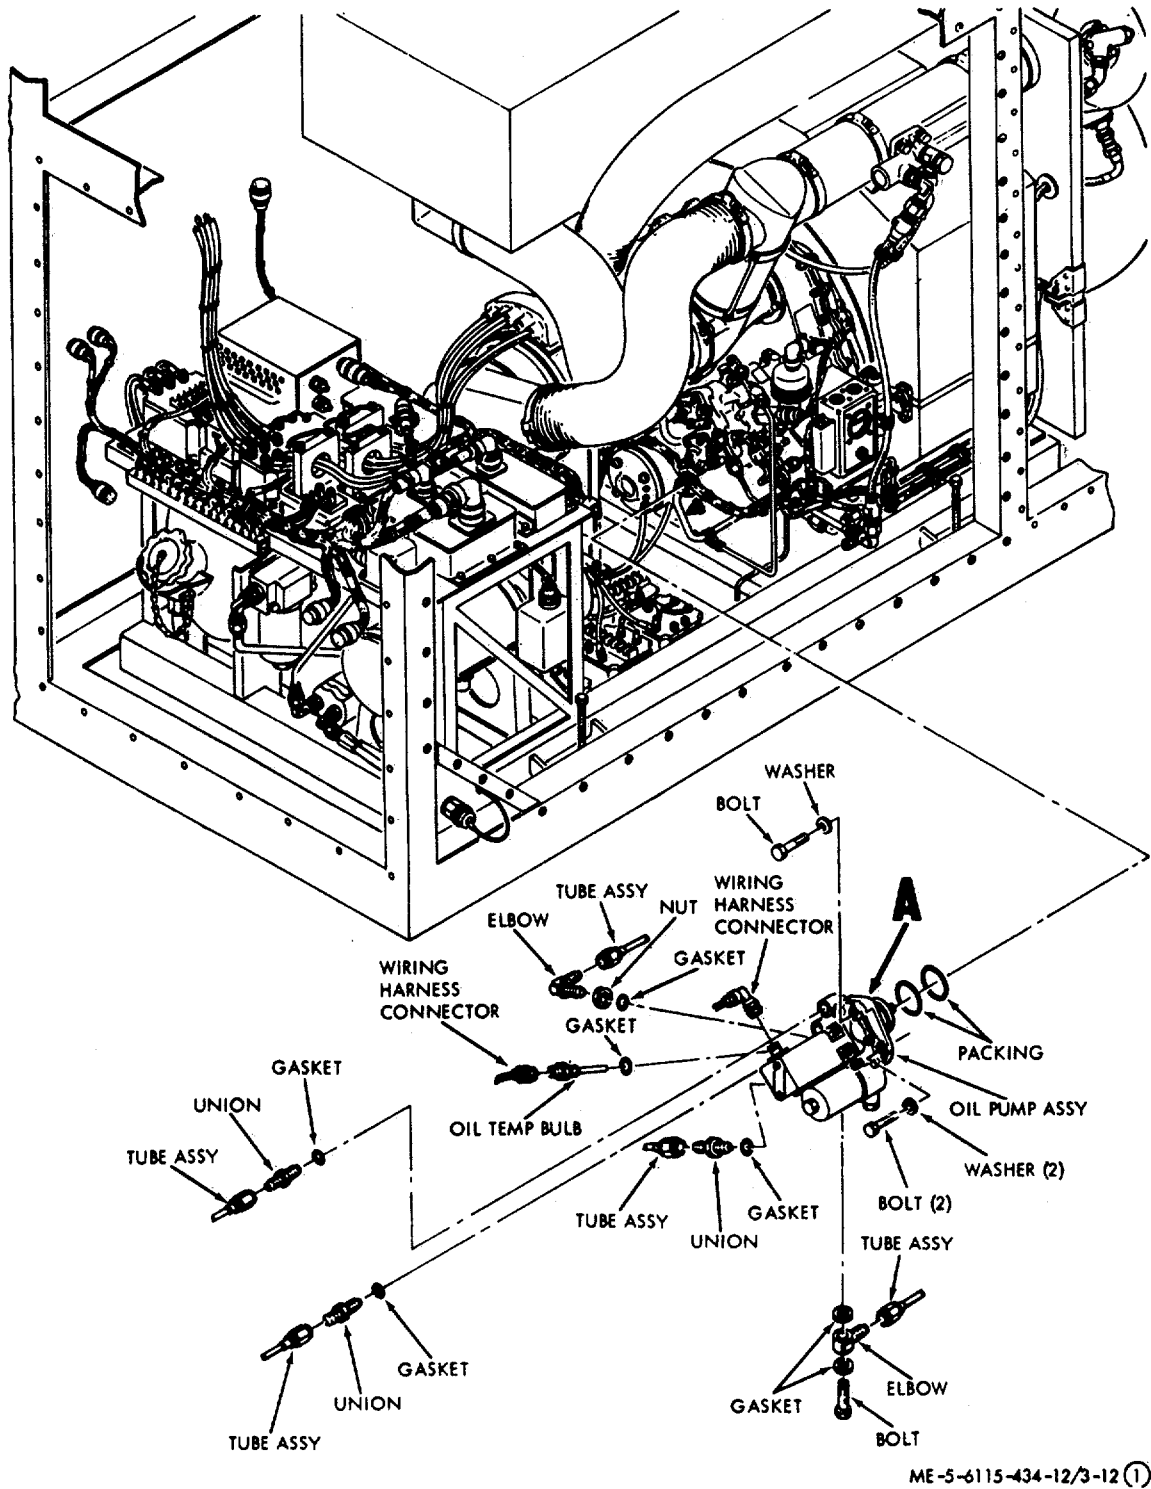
Lubrication system component replacement (Sheet 1 of 2).
